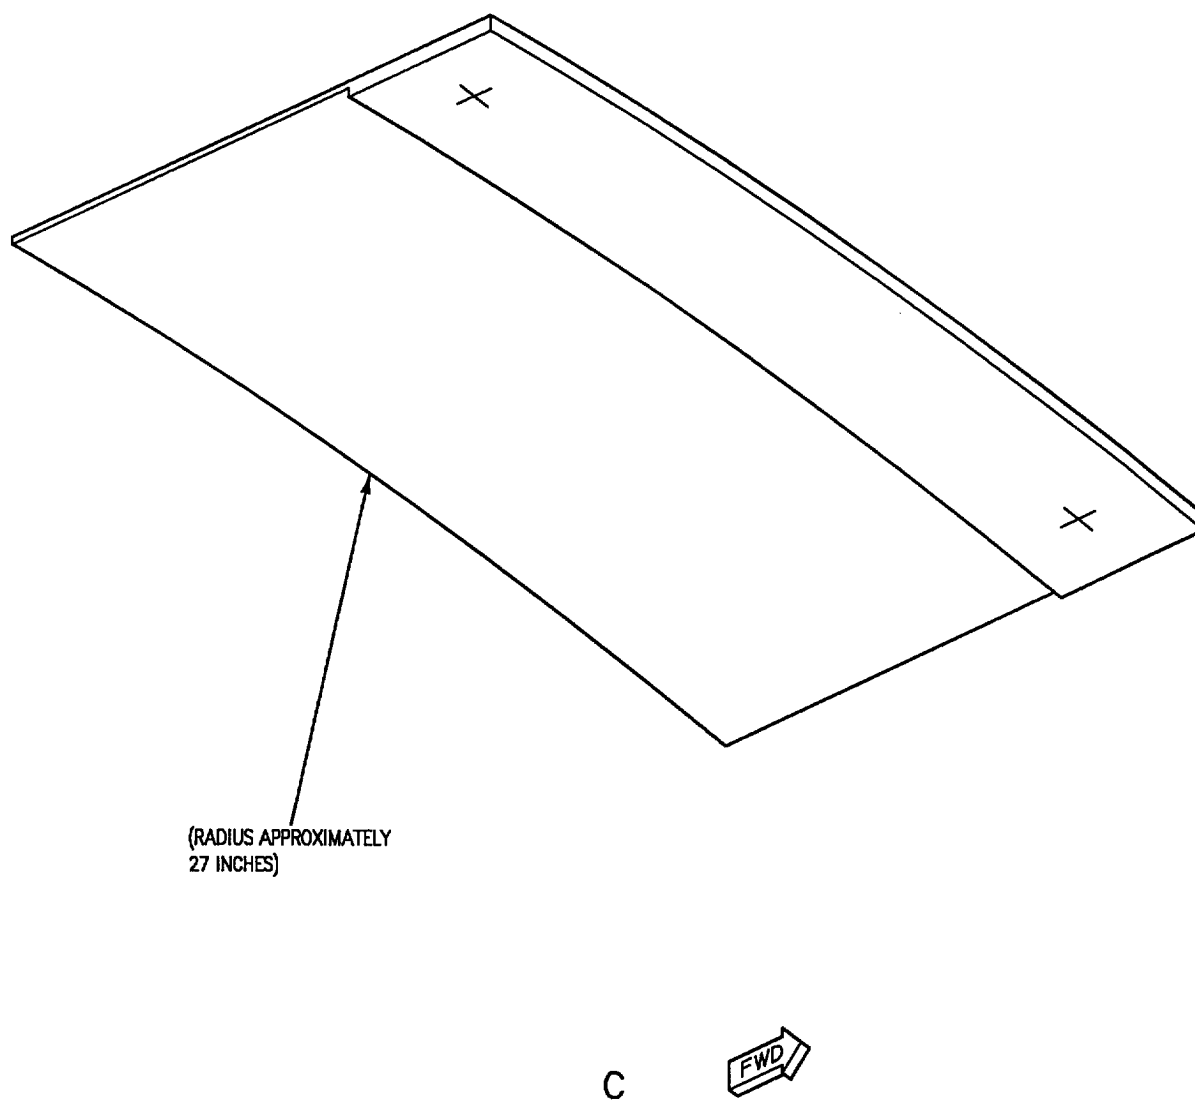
Replacement, Skin, 74T030348 (Sheet 2)
